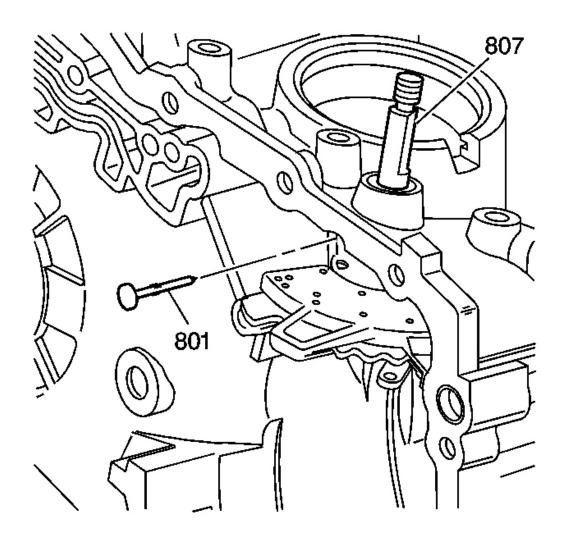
Installing Manual Shift Shaft Pin Courtesy of GENERAL MOTORS CORP.
